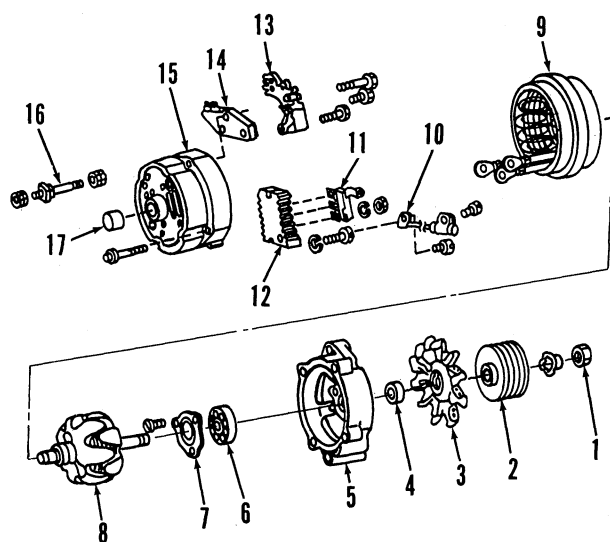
Exploded view of Delco-Remy alternator used on tractors that are not equipped with Sound-Gard body.
